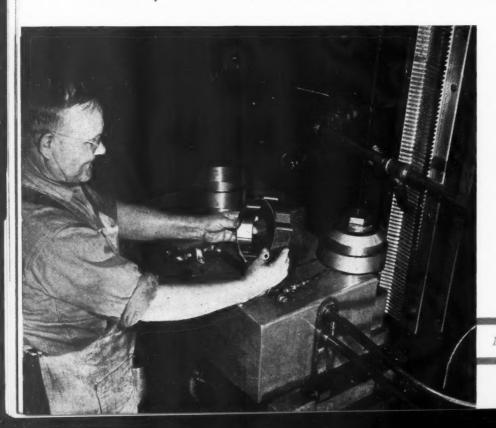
Five brake-band lugs are obtained from a single steel ring by broaching the ring with the equipment here illustrated, and then sawing it apart
